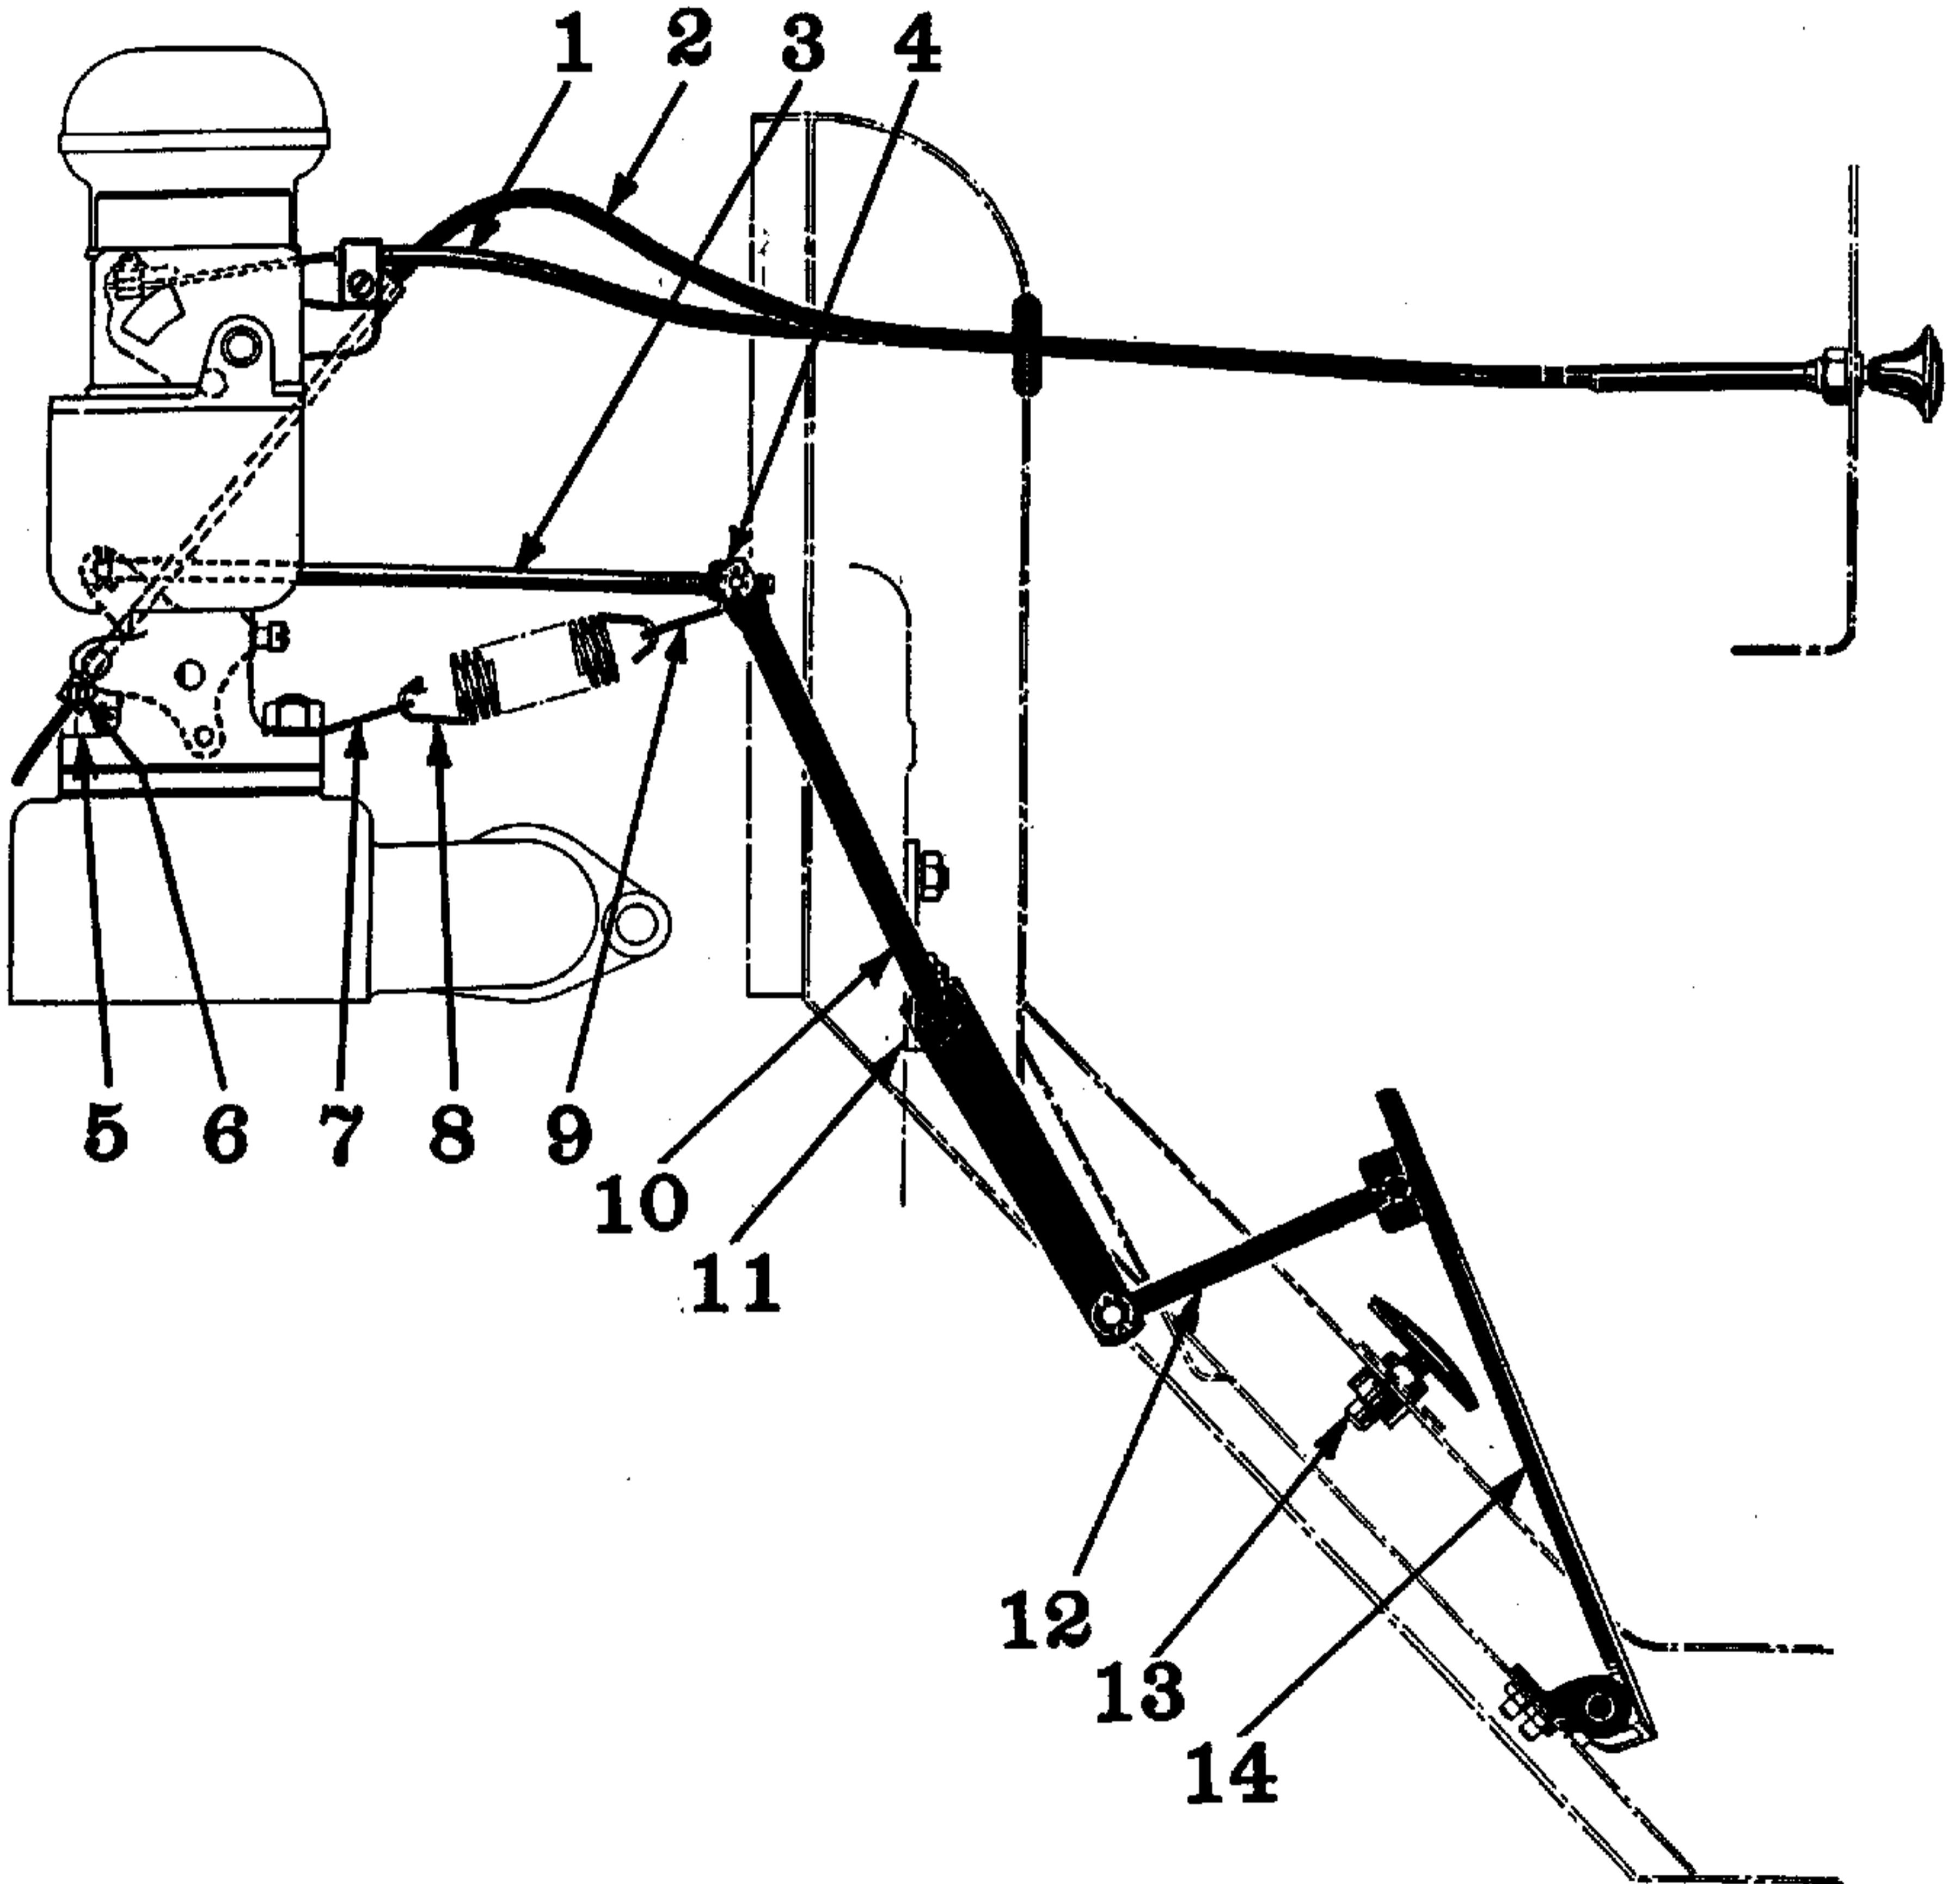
ACCELERATOR, THROTTLE and CHOKE CONTROL
